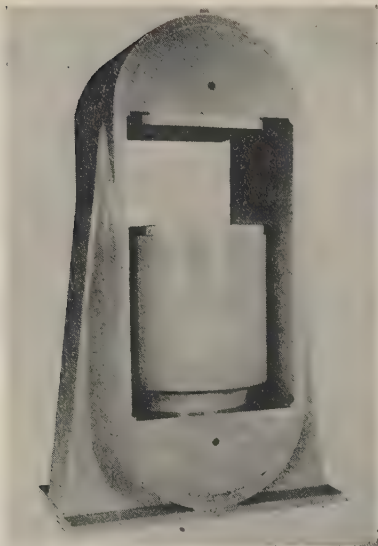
CYLINDER ON HYDRAULIC PRESS
